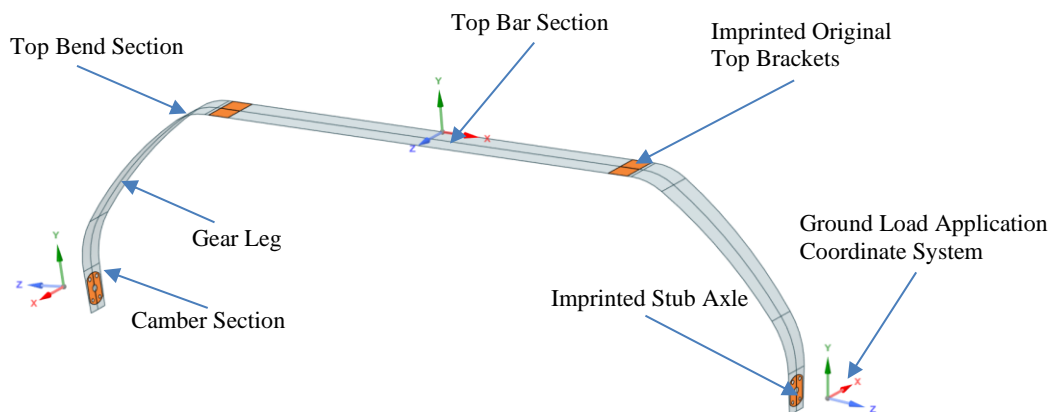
Imprinted Stub Axles and Mounting Brackets on 1st Stage Composite Gear Surface
